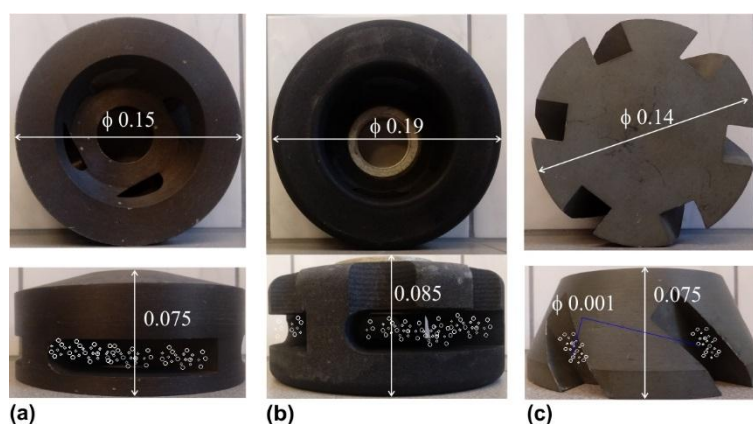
View of the rotary impellers applied in the measurements: (a) commercial impeller design A; (b) new impeller design B; (c) commercial impeller design C. Unit: m.
